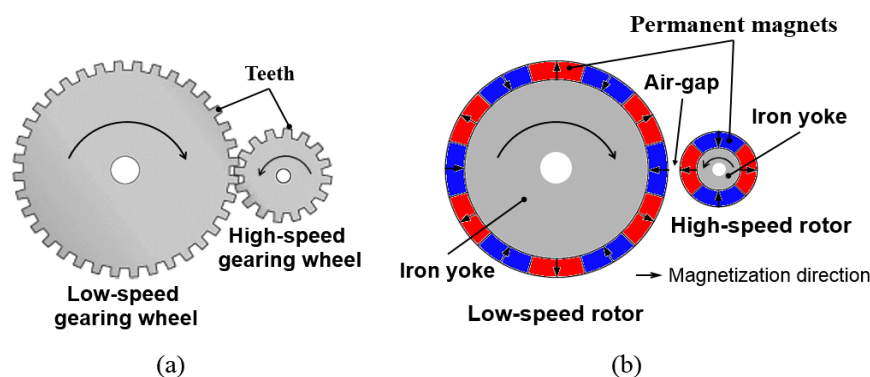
Equivalent gears: (a) Mechanical spur gear; (b) Magnetic spur gear.
